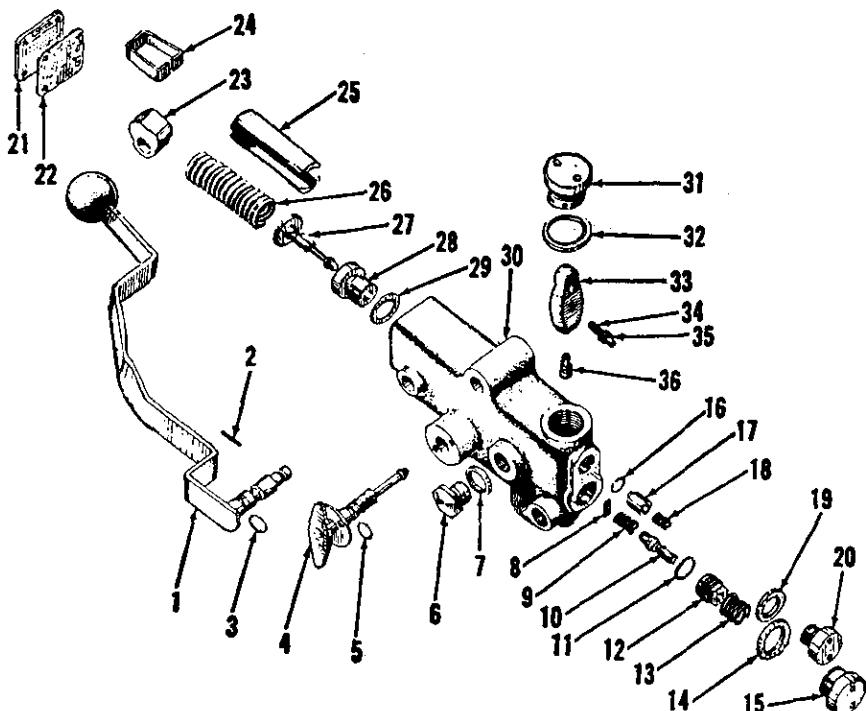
Exploded view of the B-275 series hydraulic control valve. A remote coupling attachment may be installed instead of plug (6).
